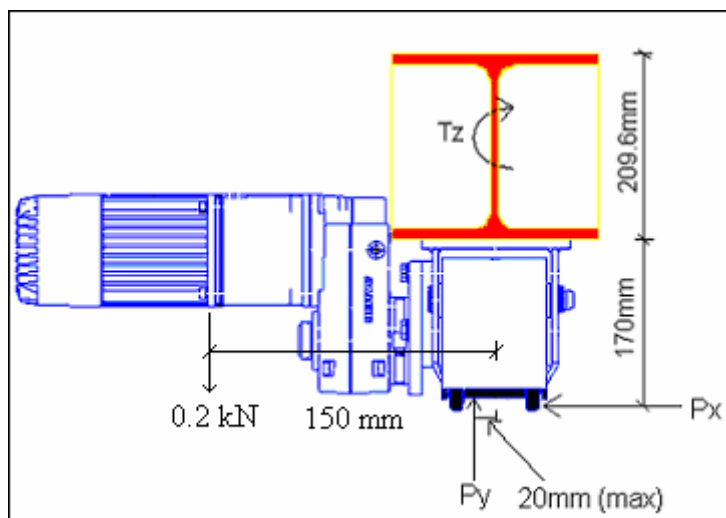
Lateral elevation of cantilever beam with eccentric load vectors at wheel
